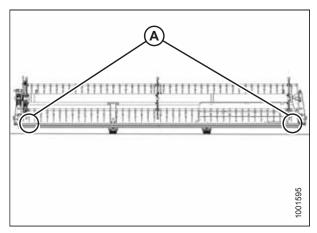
Reel Clearance Measurement Locations – Single Reel Shown
